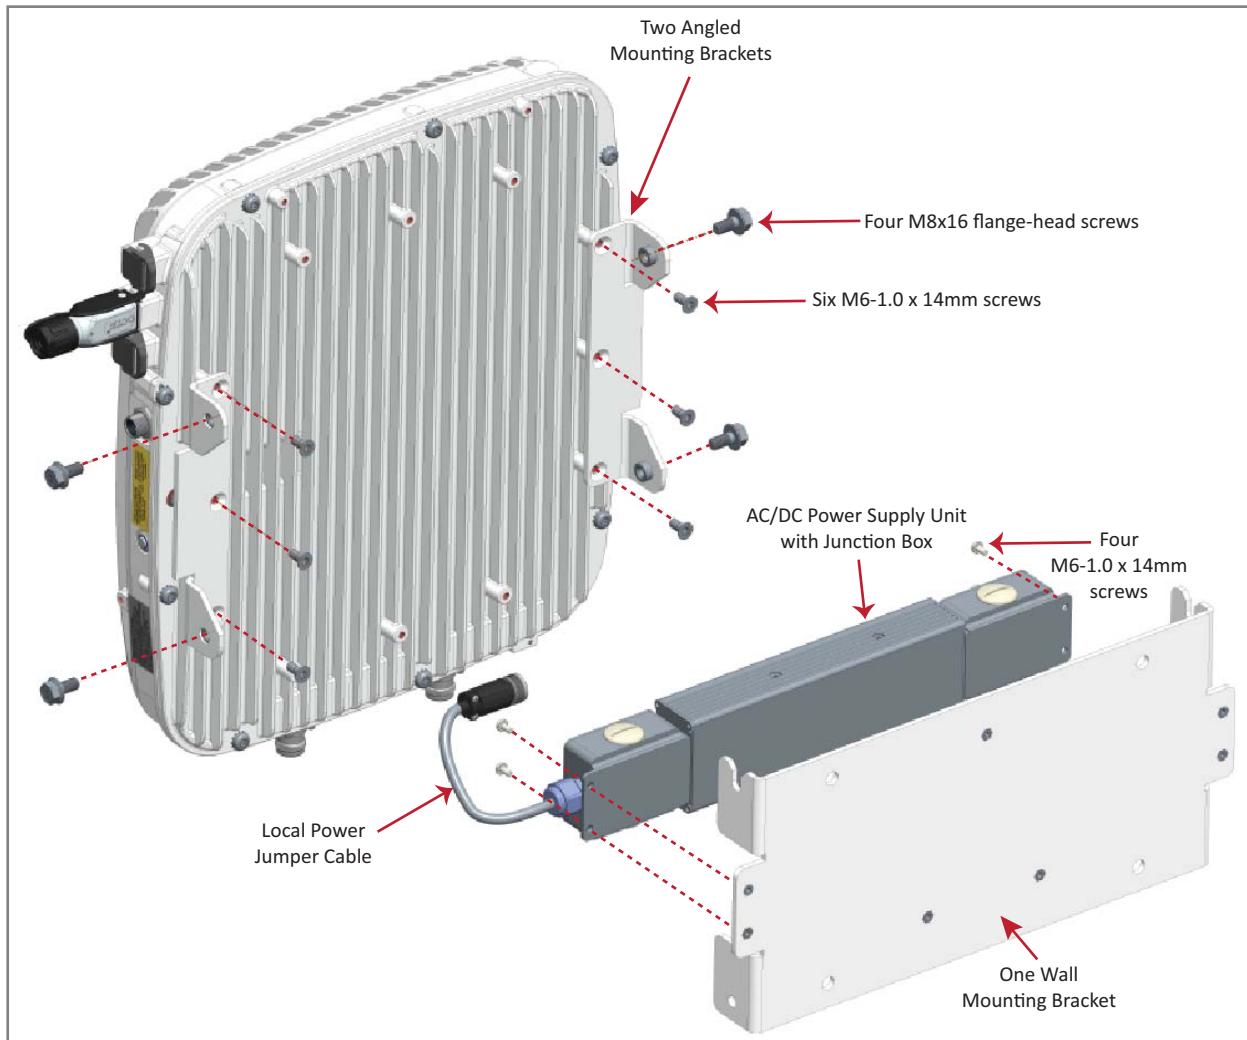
CAP L (No Fan Kit) with AC/DC Power Supply Kit (PN 7775087-xx) and CAP L Mounting Bracket Kit (7774354-xx)
